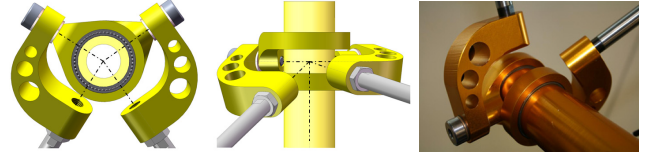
(left and center) CAD model of spherical joint mechanism. (right) Actual part used in the first BONES prototype.
